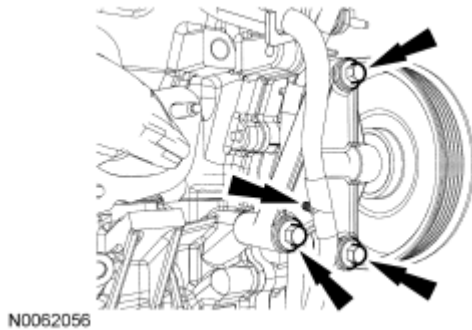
Identifying Bolts And Wiring Harness Retainer
